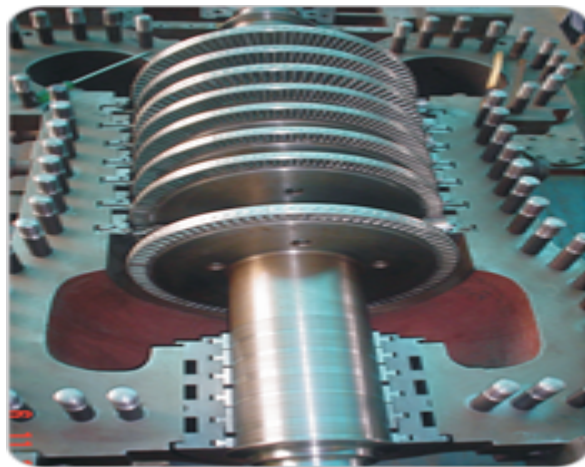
A diagram showing the rotor assembly of a steam turbine.
